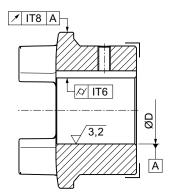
Tolerances for the finished bore in coupling part 1/2 (1 or 2)
